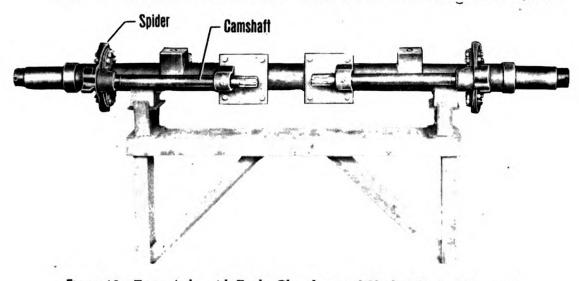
Front Axle, with Brake Chambers and Slack Adjusters Removed
